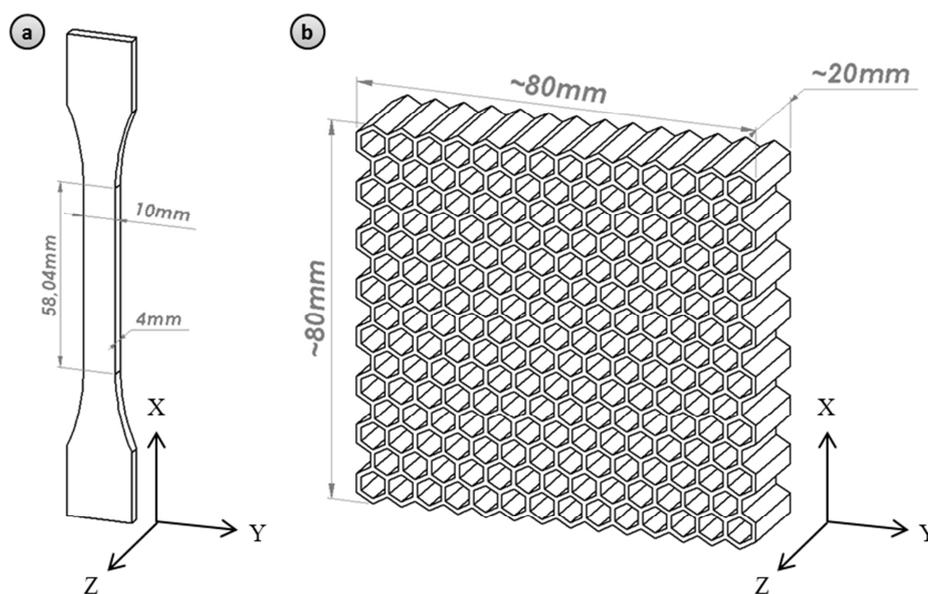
Manufacturing orientation (OXY - plane base table, OZ - direction of slicing) and dimensions of specimens: (a) flat tensile specimen and its reference dimensions; (b) structure example (Honeycomb) and its dimensions
